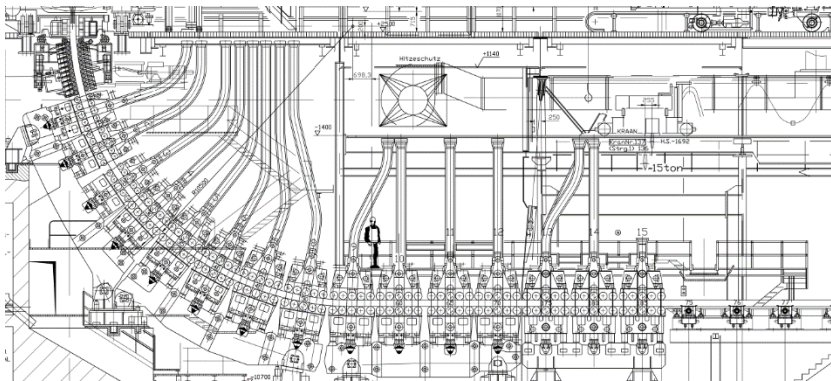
cross-sectional view of a continuous caster. Top left is the casting mould, further down are the rolls supporting the solidifying strand.
